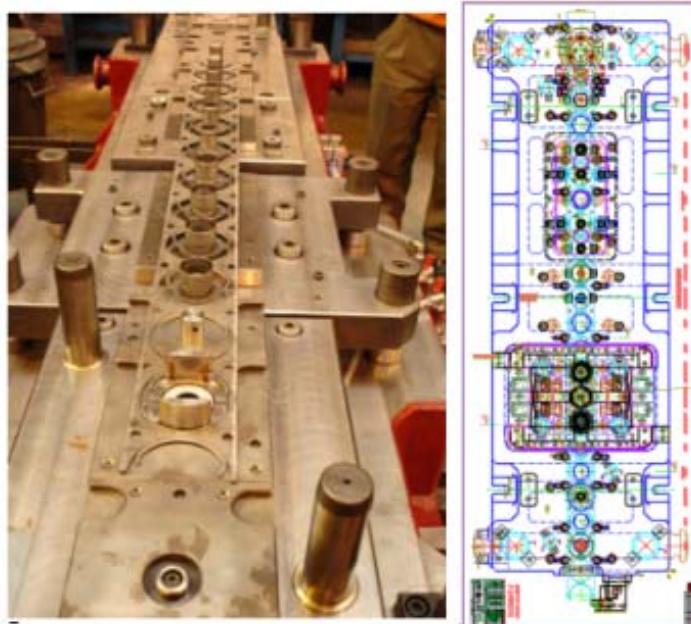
Drawing and picture of the tooling used to manufacture the Synemblock
